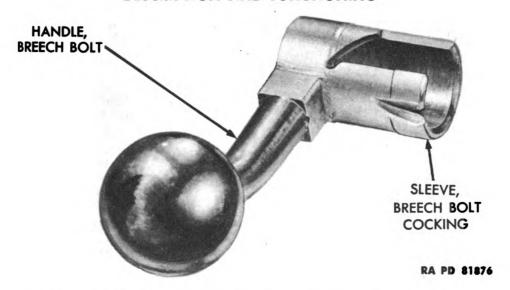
Breech Bolt Cocking Sleeve Assembly of Winchester Rifle, Cal. .22, Model 75
